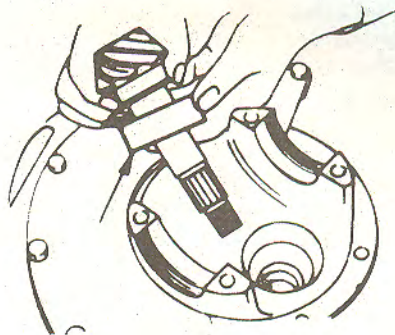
The arrow shows the dummy bearing on the pinion shaft. The spacer should be placed between the bearing and the pinion head.
